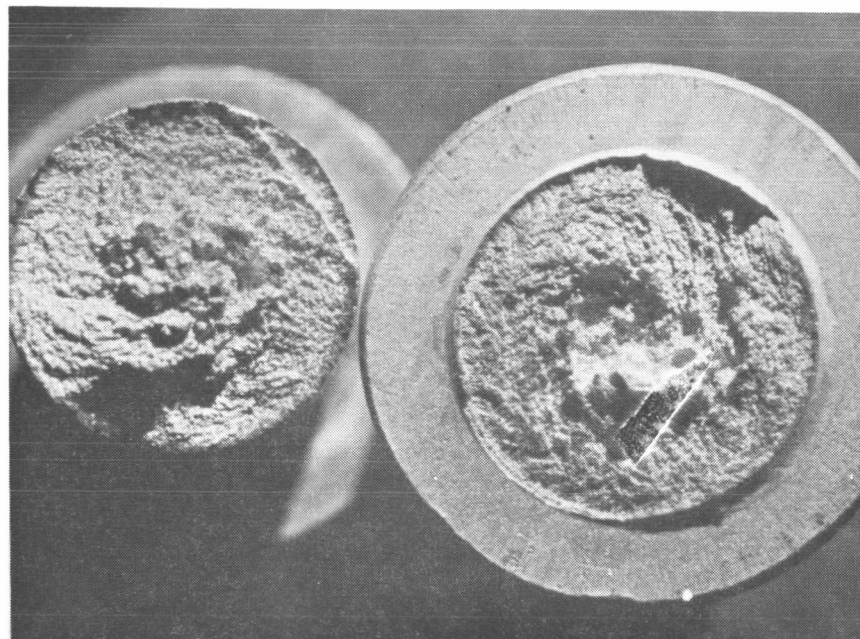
FIGURE SURFACES, SPECIMEN 5, 8X
